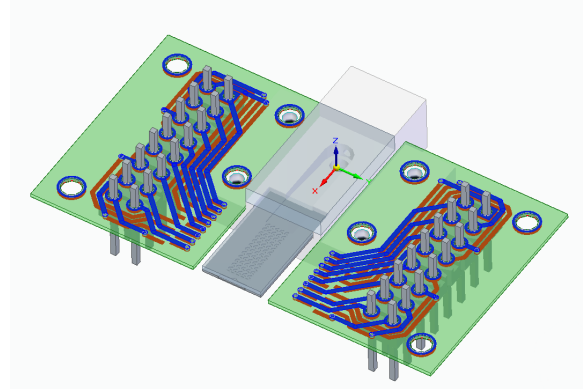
CAD assembly of the VLM and 2nd iteration fluidic interface with a twin PCB design. The PCBs would be glued to the fluidic interface, and a piece of glass would be used to seal the fluidic interface. The PCBs are shown as semi-transparent, even though in reality they are opaque.
